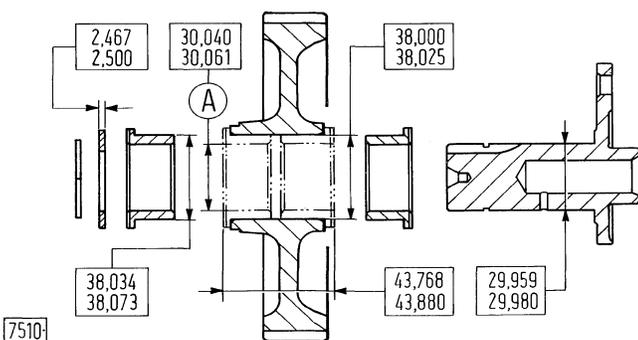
Idler gear, Bush and Jackshaft details - A. Bush fitted bore diameter
